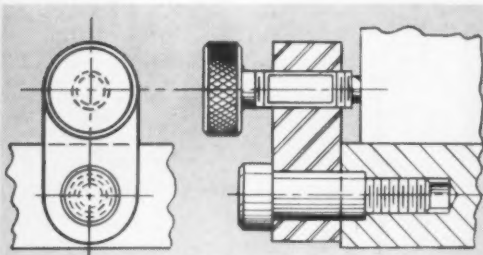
Drawing of swinging clamp in which a short arm, that is rounded at both ends, is pivoted on a stripper bolt.
